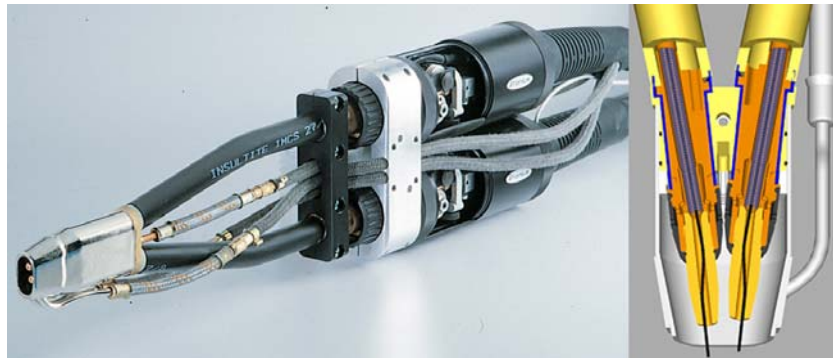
Robacta Drive Twin Push-Pull torch for tandem welding – overview and detail.
